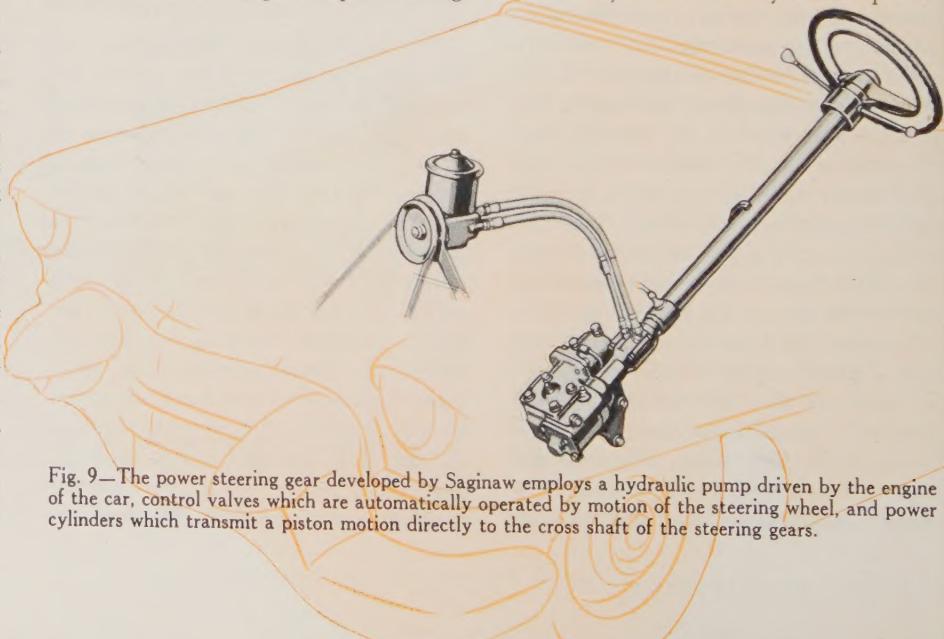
The power steering gear developed by Saginaw employs a hydraulic pump driven by the engine of the car, control valves which are automatically operated by motion of the steering wheel, and power cylinders which transmit a piston motion directly to the cross shaft of the steering gears.
